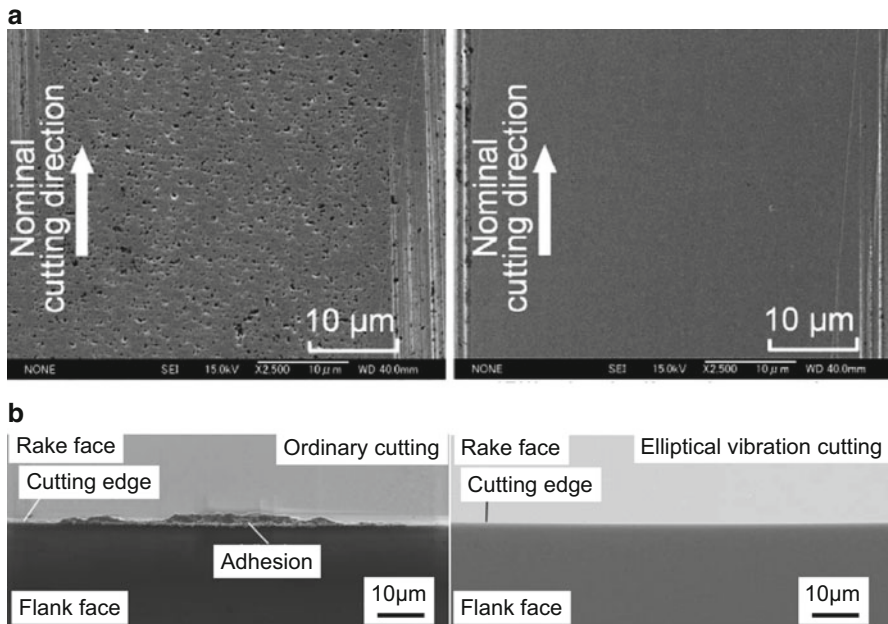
Comparison of elliptical vibration cutting (right) with ordinary cutting (left). (a) SEM images of grooved surface (workpiece, BL4: depth of cut [μm], 0.2; nominal cutting speed [mm/min], 150) (b) Cutting edges after grooving (workpiece, Co1)
